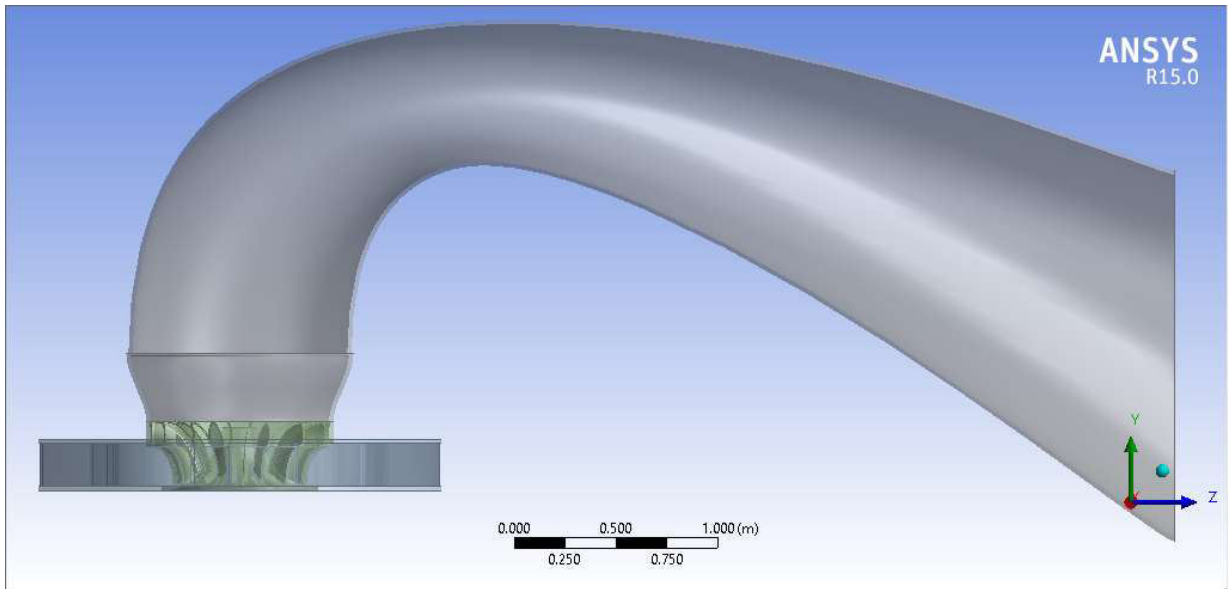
Separated assembly model with stay vanes, guide vanes, runner and draft tube
